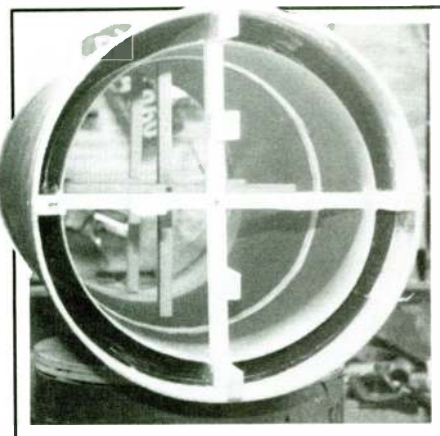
A bottom view of the interior of the cabinet after the inner tube assembly has been mounted, and the pine structural supports have been installed.
